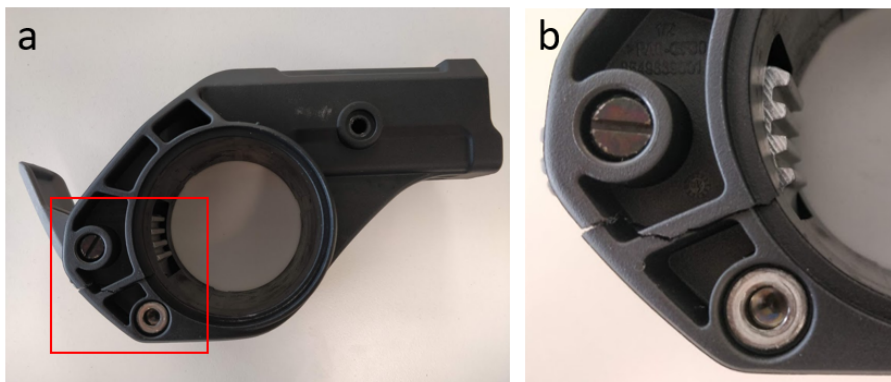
Fracture of console test 4 (a) and (b) close up of the fracture.
